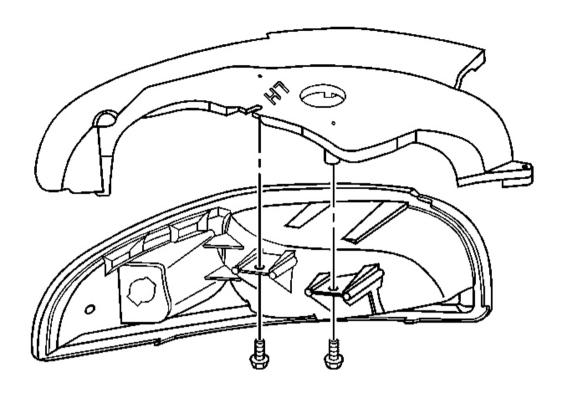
Lamp To Bracket & Screws Courtesy of GENERAL MOTORS CORP.
